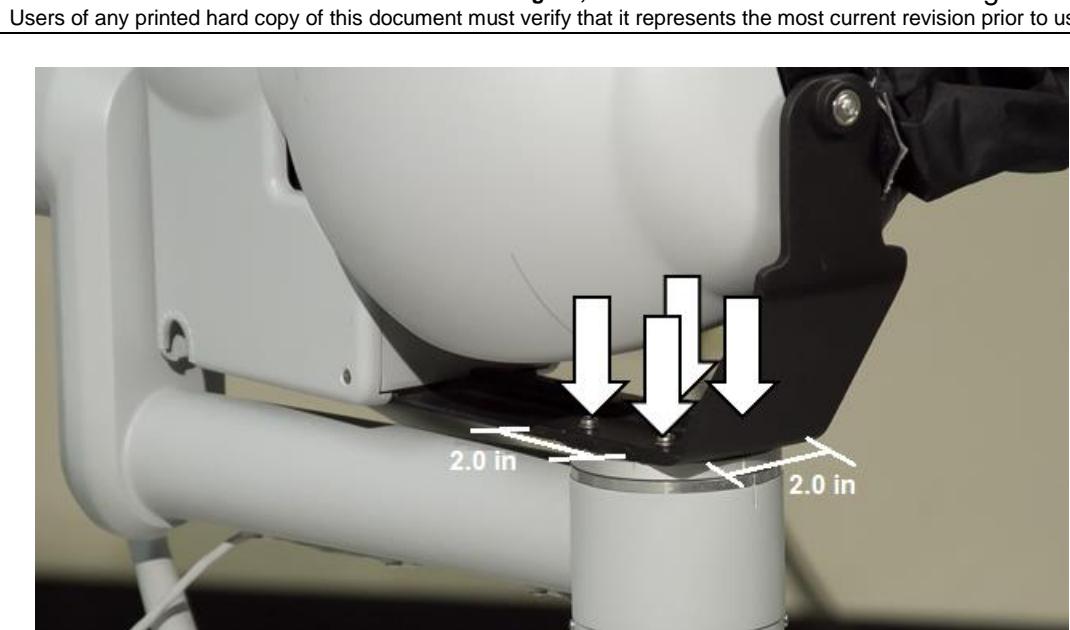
PSM SIDE VIEW – MOUNTING PLATE AND MOUNTING HOLES.
